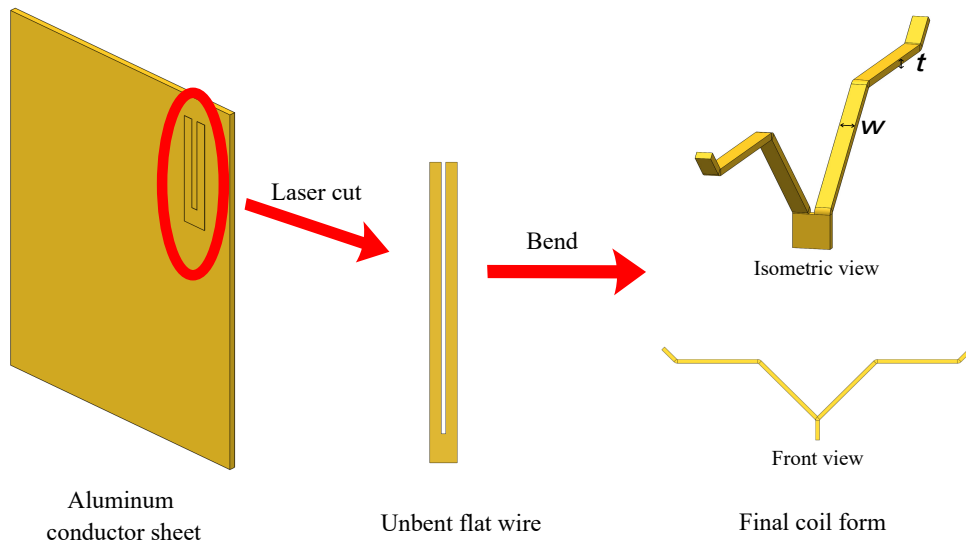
Making of a Flat Wire (retrieved from [5])
